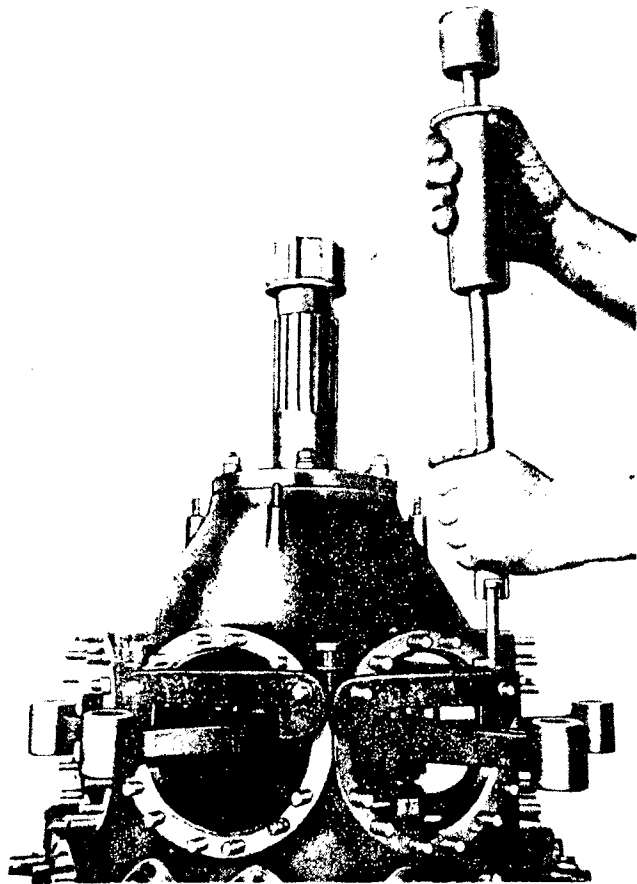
Removing Crankcase Bolts with Tool No. 3893
